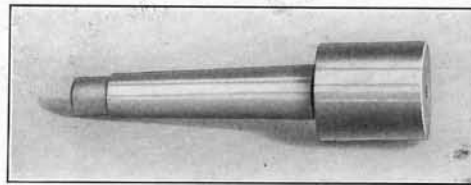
Blank Center. Head is soft, 1" dia., $1\frac{1}{8}$ " long and may be turned to desired form. Taper shank fits center chuck and tailstock spindle
